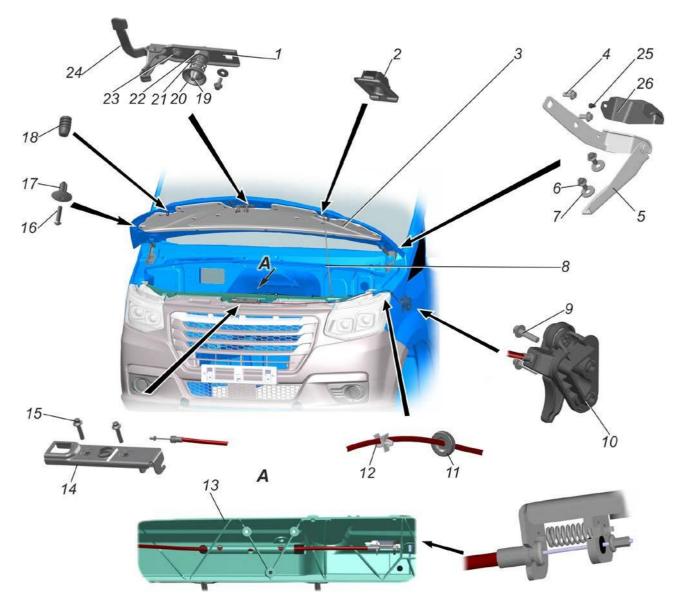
Hood upper hinge and lock: 1 - hood lock latch body; 2 - stop socket; 3 - thermal and sound hood insulation; 4, 6, 9, 15, 23 - bolts; 5 - hood hinge; 7 - washer; 8 - hood stop; 10 - drive of hood lock with rod; 11 - sealing bushing; 12 - clip; 13 - frontend; 14 - hood lock; 16.25 - piston(s); 17 - piston socket; 18 - buffer; 19 - pin; 20 - support cup; 21 - spring; 22 - nut; 24 - safety hook; 26 - hinge plate
